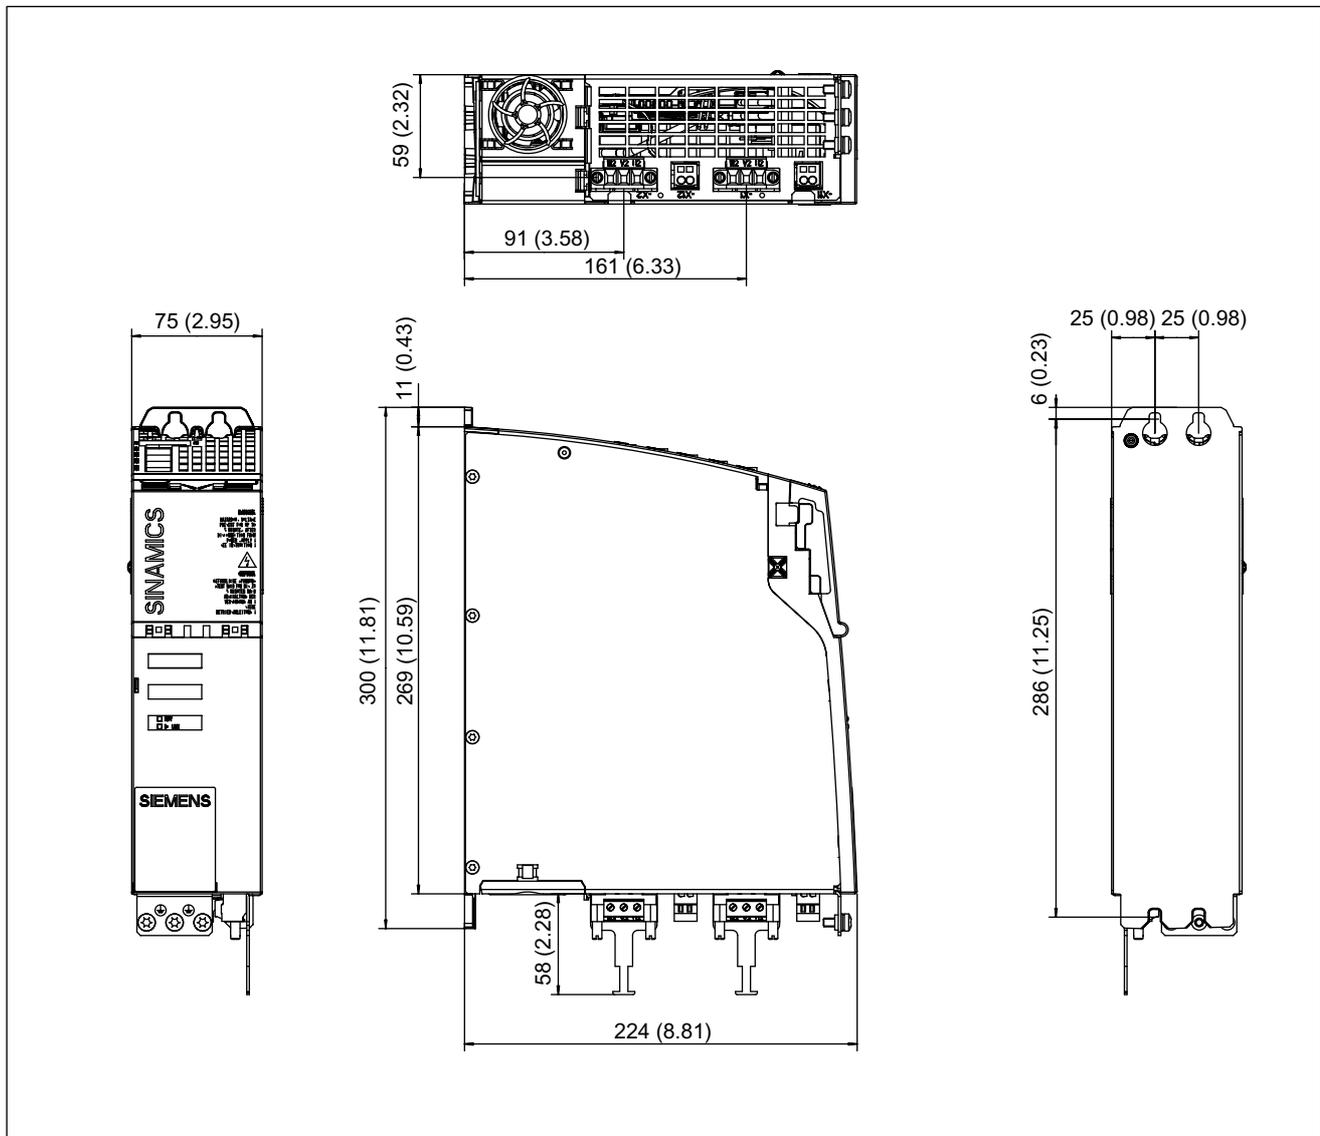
Dimension drawing of Double Motor Module in compact format 2 x 1.7 A, 2 x 3 A, and 2 x 5 A, all dimensions in mm and (inches)
